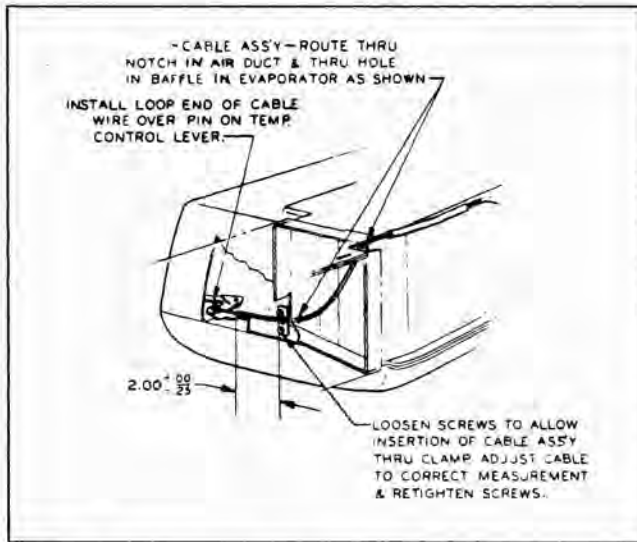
Pontiac Temperature Control Cable Hook-up at Evaporator Housing
